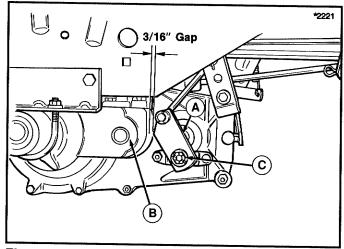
Parking Brake Adjustment - Hydro Models (Mfg. Nos. 1692156, 1692164) (Viewed from right side of transaxle with rear wheel removed)
